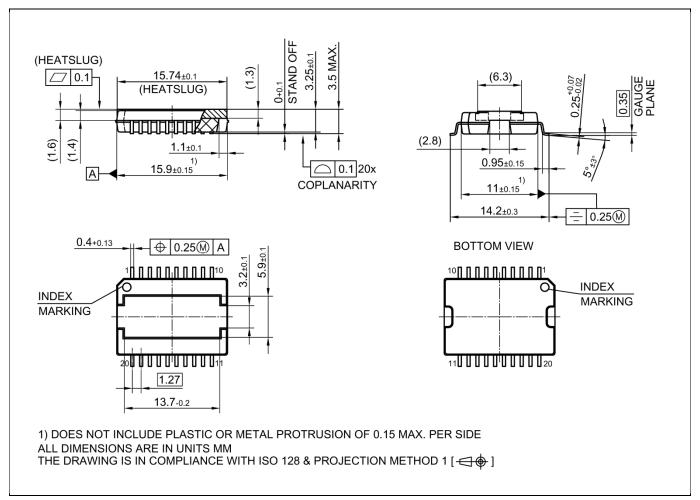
PG-DSO-20-87 Package Outline, dimensions (mm)
